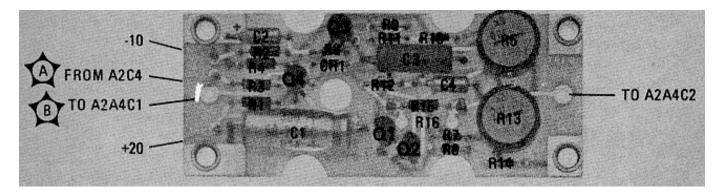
500 MHz LO Drive Assembly A2A2 (P/O Change A)
